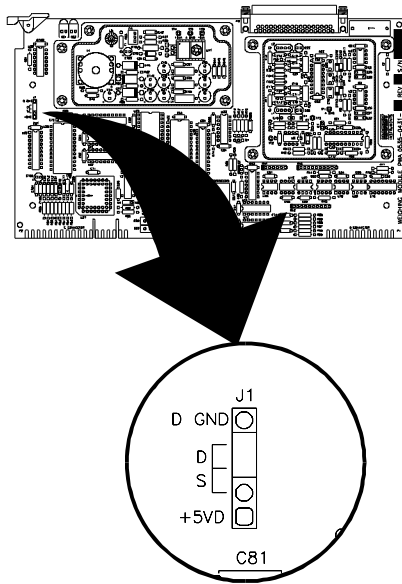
J1 JUMPER LOCATION/SERIES B
